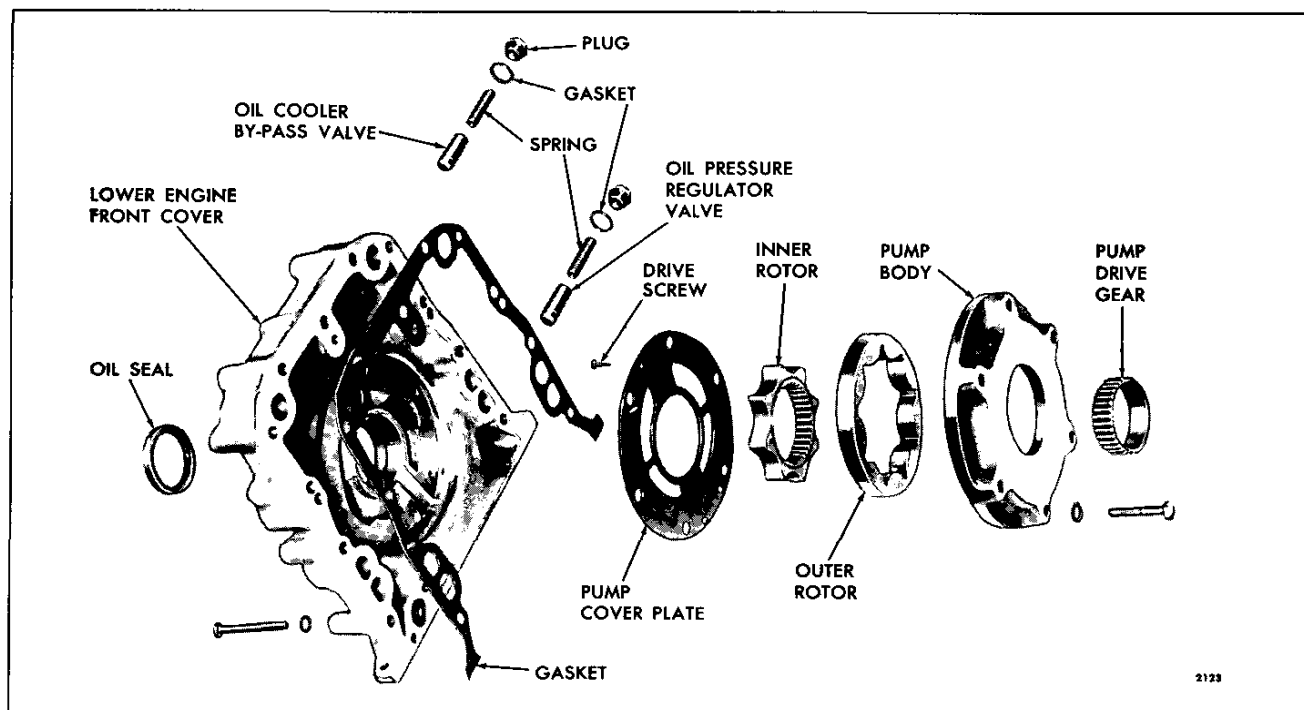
Oil Pump Details and Relative Location of Parts (Former)
